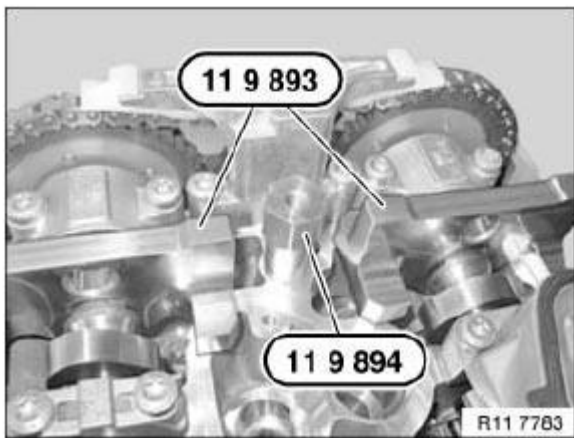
Positioning Special Tool 11 9 893 On Inlet And Exhaust Camshafts
